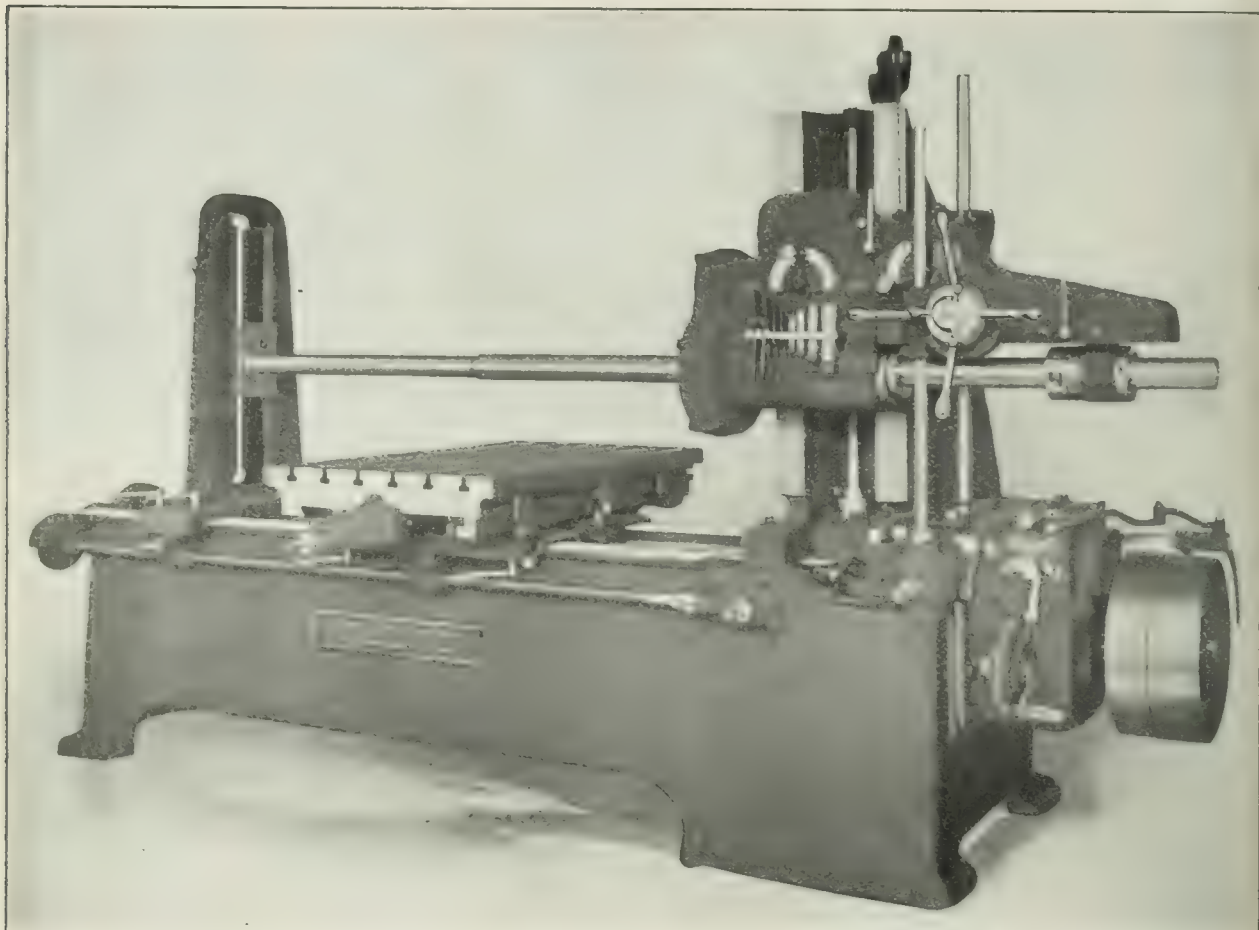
Front View of the No. 3 Horizontal Boring Machine Built by the Universal Boring Machine Company, Hudson, Mass.
